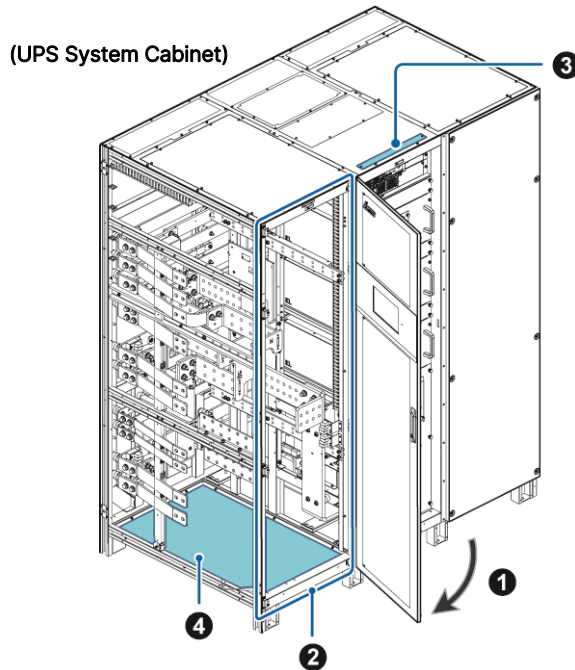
Open the Middle Front Door & Remove the Left Front Door, Top Cover and Bottom Cover
